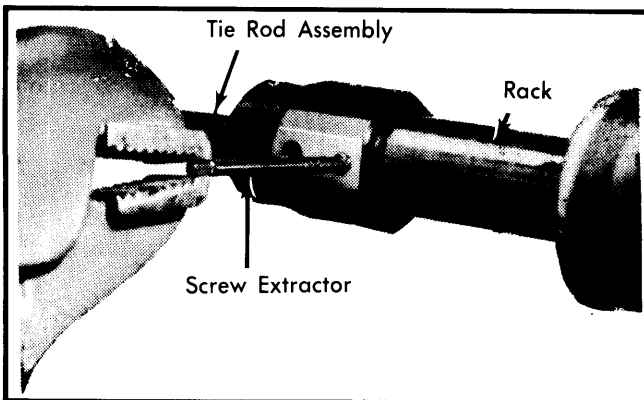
Removing Spiral Pin With Screw Extractor (Escort, Lynx and TRW Gears Only)
